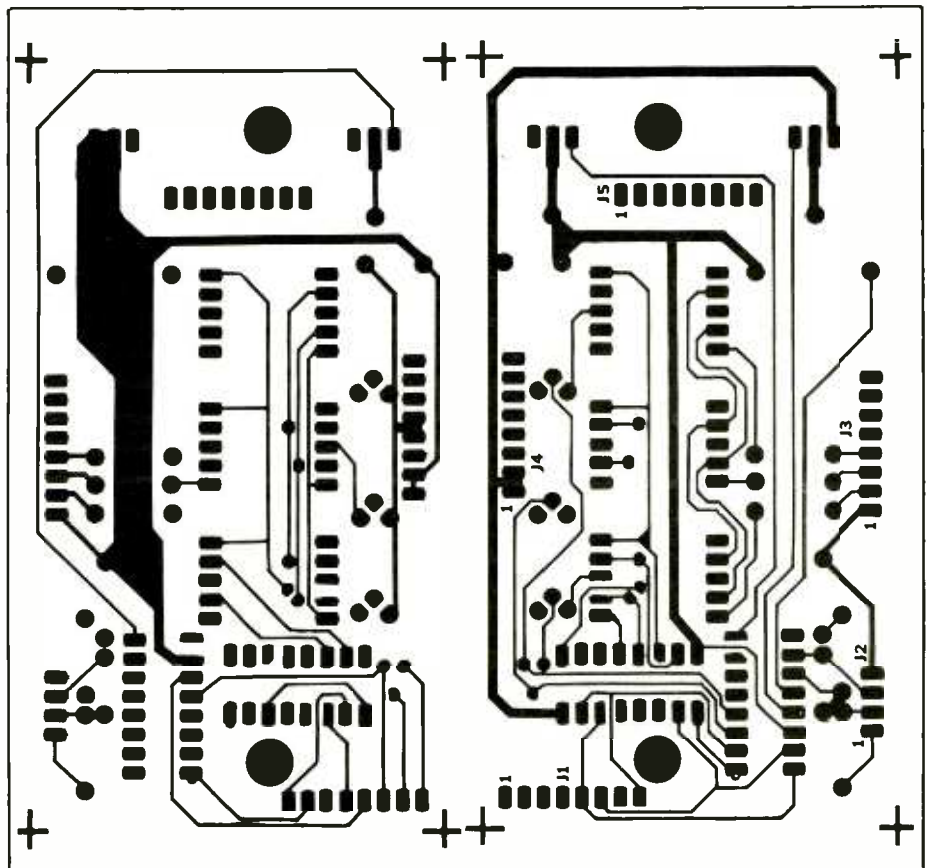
Actual size etching-and-drilling guides for the top and bottom of the DMS printed-circuit board.
